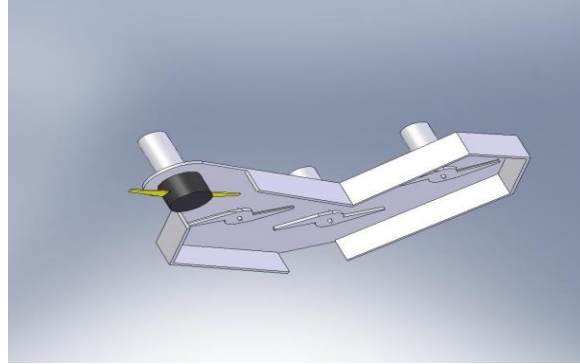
Solid Works Drawing of the Lawnmower Deck [8].
